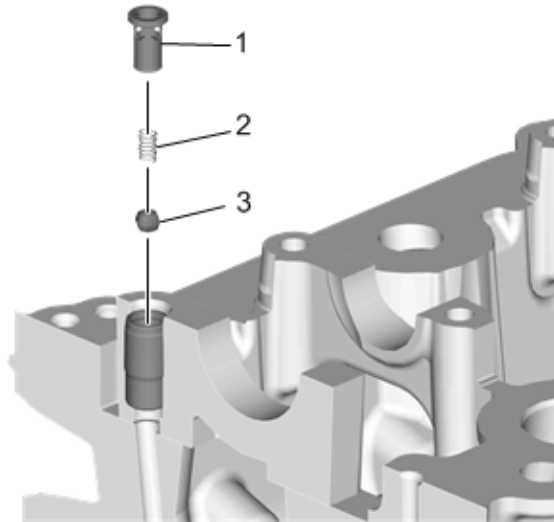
Oil Manifold Check Valve, Check Ball Spring And Check Ball
